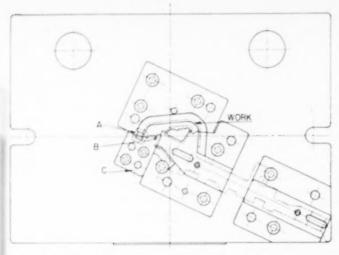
Drawing showing use of stock breaker and spreader in shaving die
